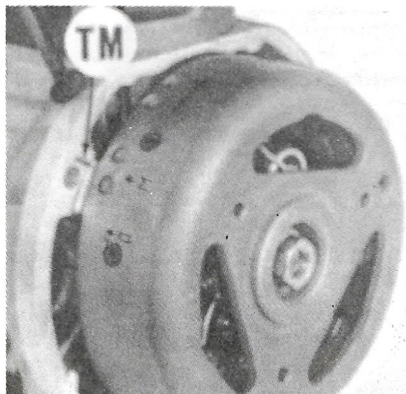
Breaker points should just open as "M" mark on flywheel aligns with timing mark (TM) on crankcase.
